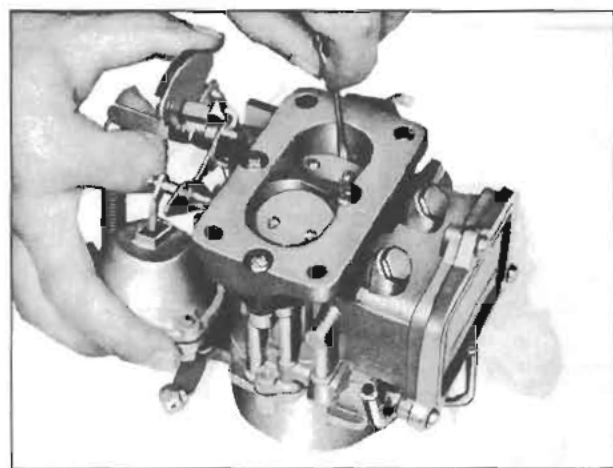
Measurement of clearance of starting interlock valve opening
